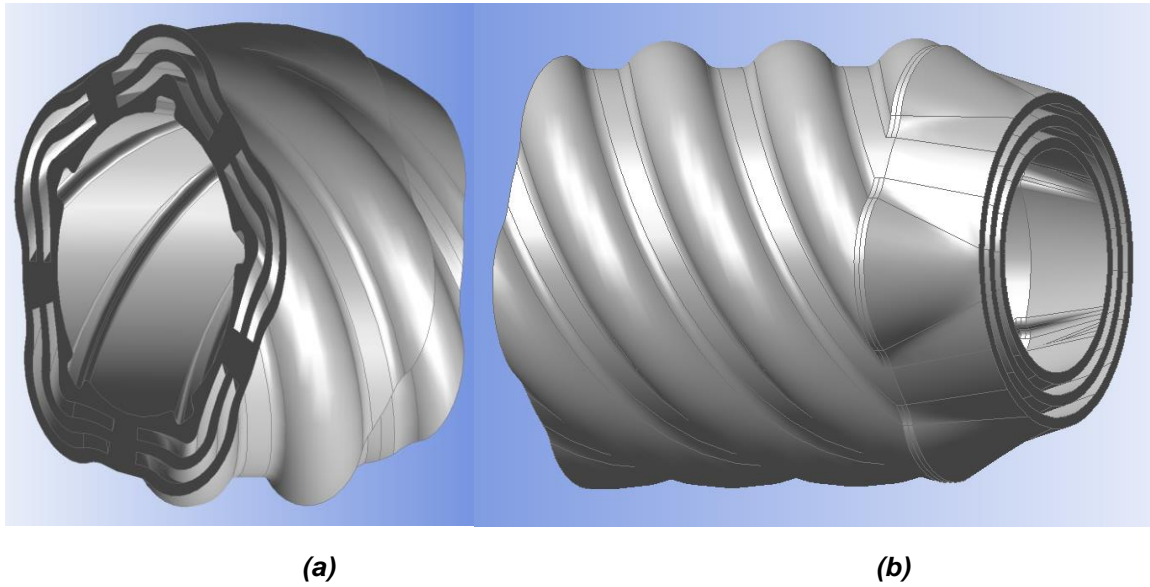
Complete outer section of the Leak Resistant Screw for the Counterflow Helical Heat Exchanger (a) the male screw connection and (b) the female screw connection including the core screw design
